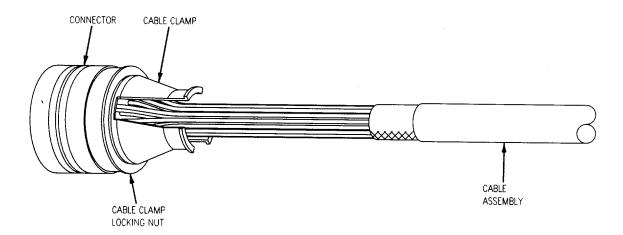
Installing EMI Cable Clamp and EMI Cable Clamp Locking Nut
